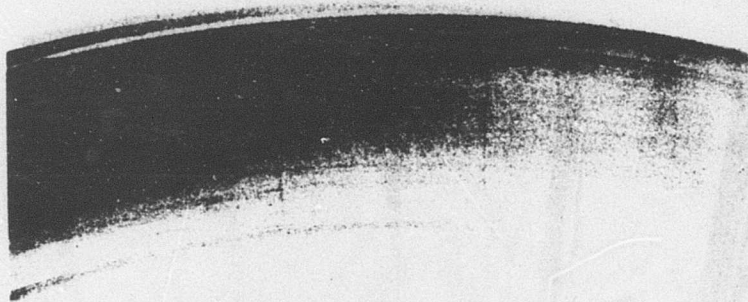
View of Cup Race Surface - Bearing S/N 73-50.
